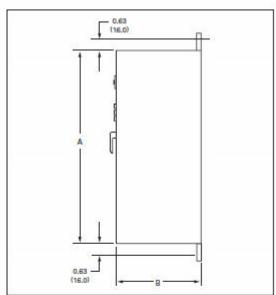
SIDE VIEW OF ENCLOSURE J
